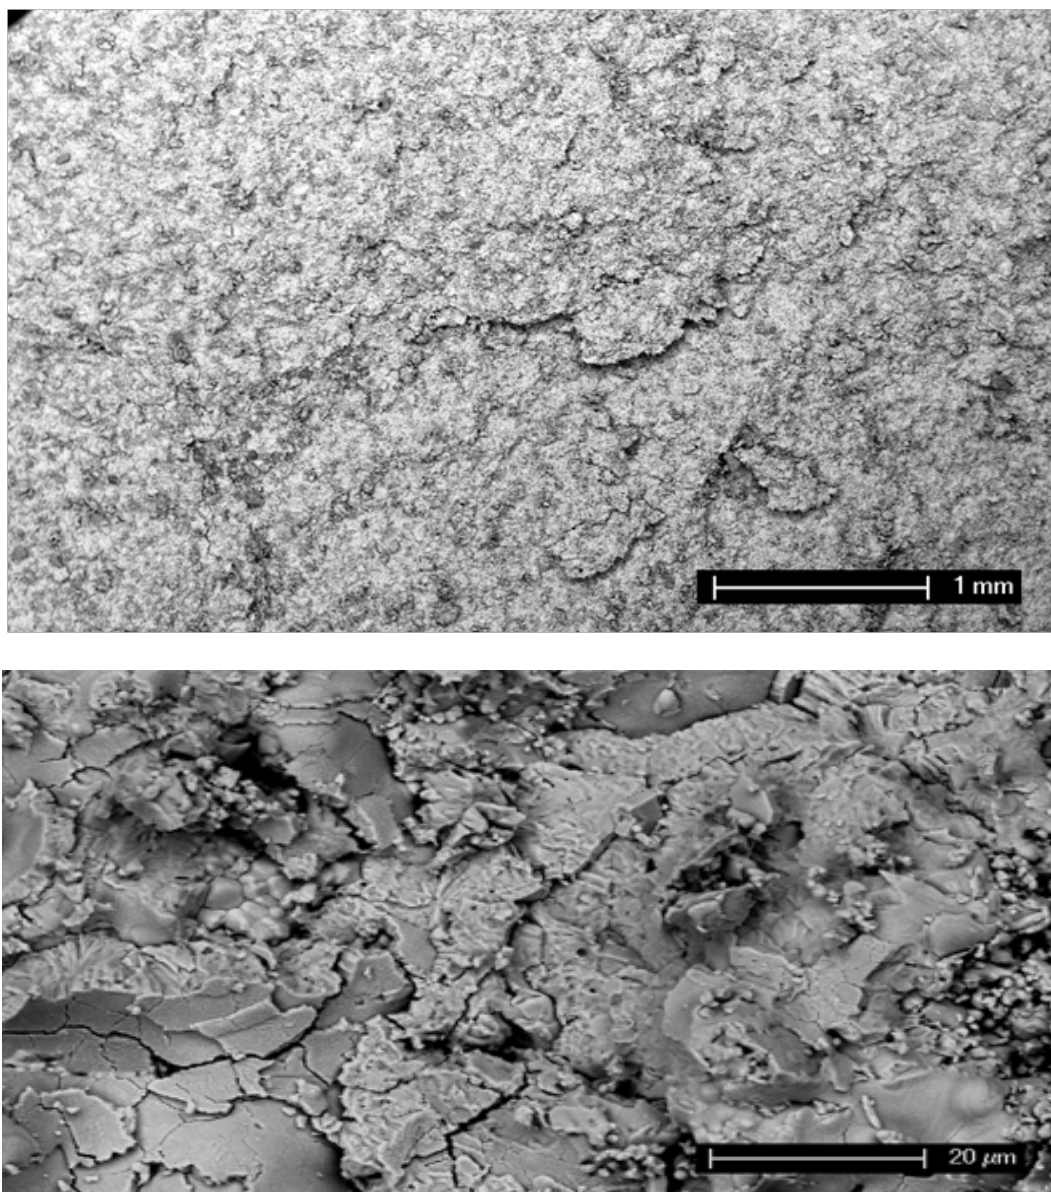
Fracture surface (at low (top) and high (bottom) magnification) of a 45 mil TBC after failure in the 1100°C FCT.
